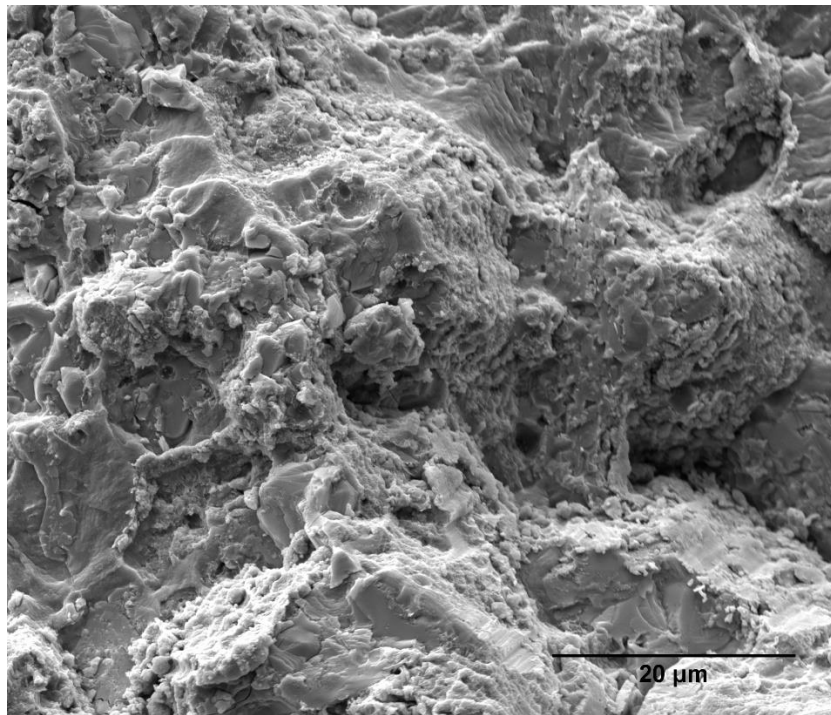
Fracture surface with granulated edges and regions of cleavage fracture
